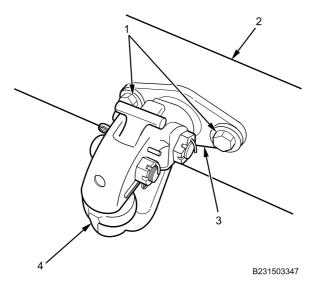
Towing Pintle Hook Assembly on Rear Frame Crossmember.
